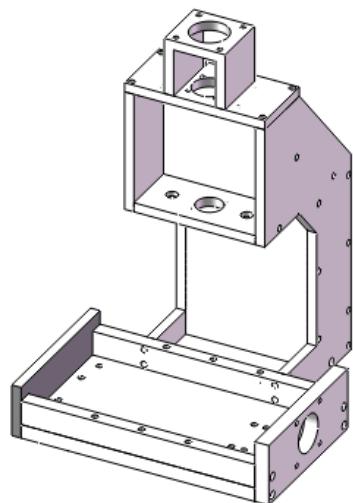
Design of open-frame support structure for mini-CNC prototype
